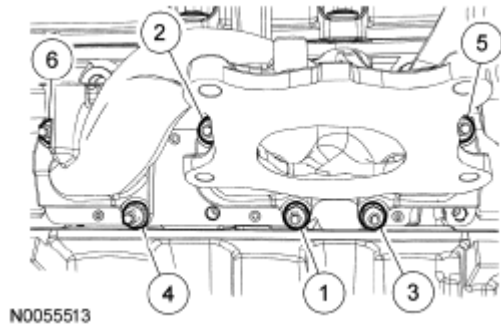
Identifying RH Exhaust Manifold Nut Tightening Sequence
